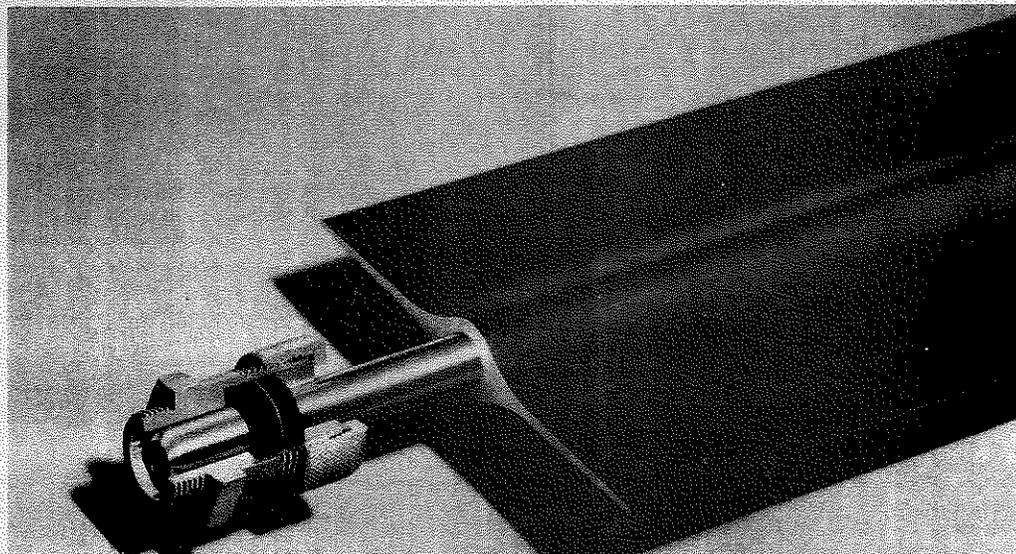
Extruded, anodized aluminum louver blade, with water seal assembly
